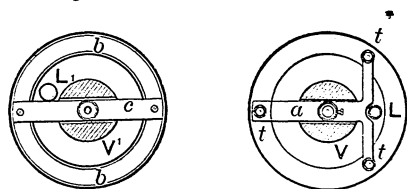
Section X Y. Fig. 3.—Section Z Z. Apparatus for Heating Test Specimens.
